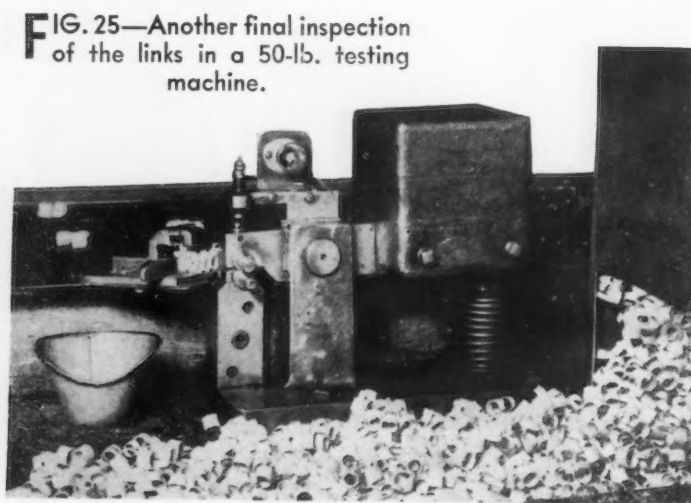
Another final inspection of the links in a 50-lb. testing machine.
